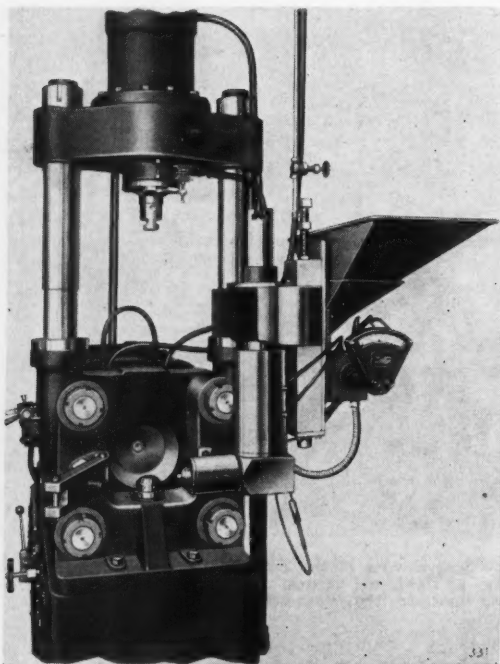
Close view of the injection end of the Lester machine. The injection cylinder and nozzle with their heating jackets can be swung back for ready access to these parts.
